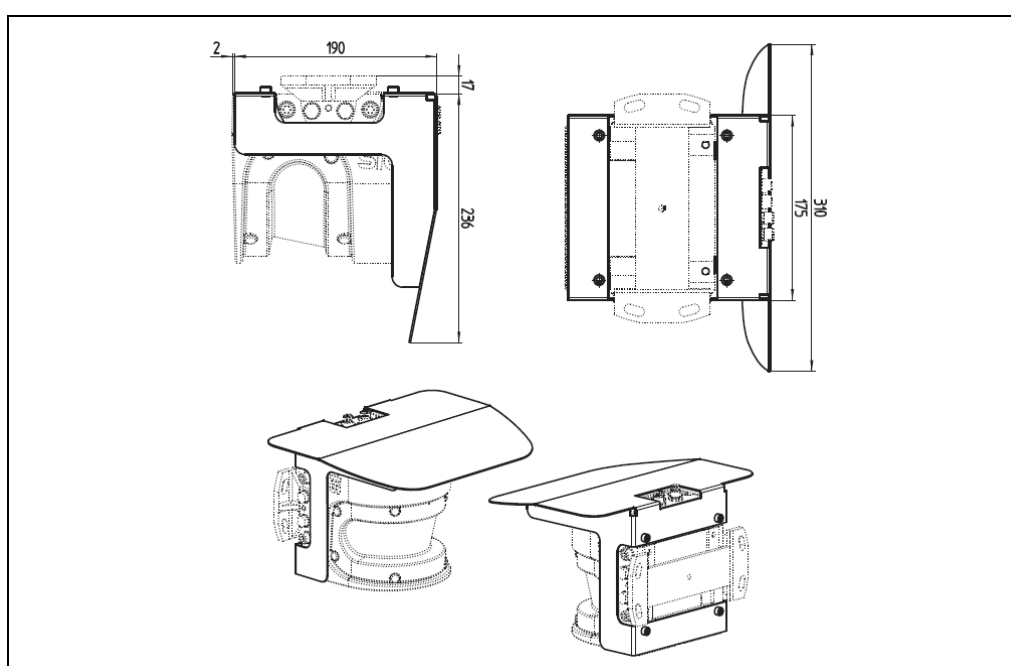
Dimensional drawings for the LMS511 SE with weather hood (small) - variant 1
